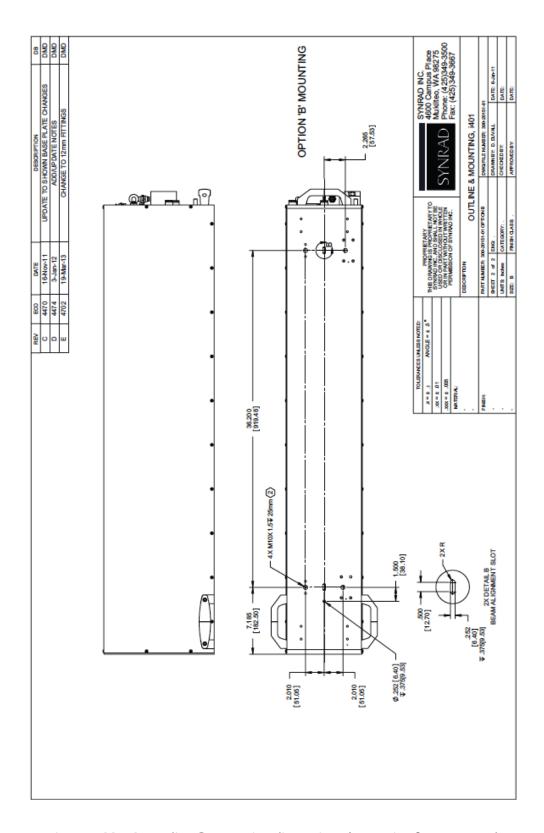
I401 outline & mounting dimensions (mounting feet removed.
